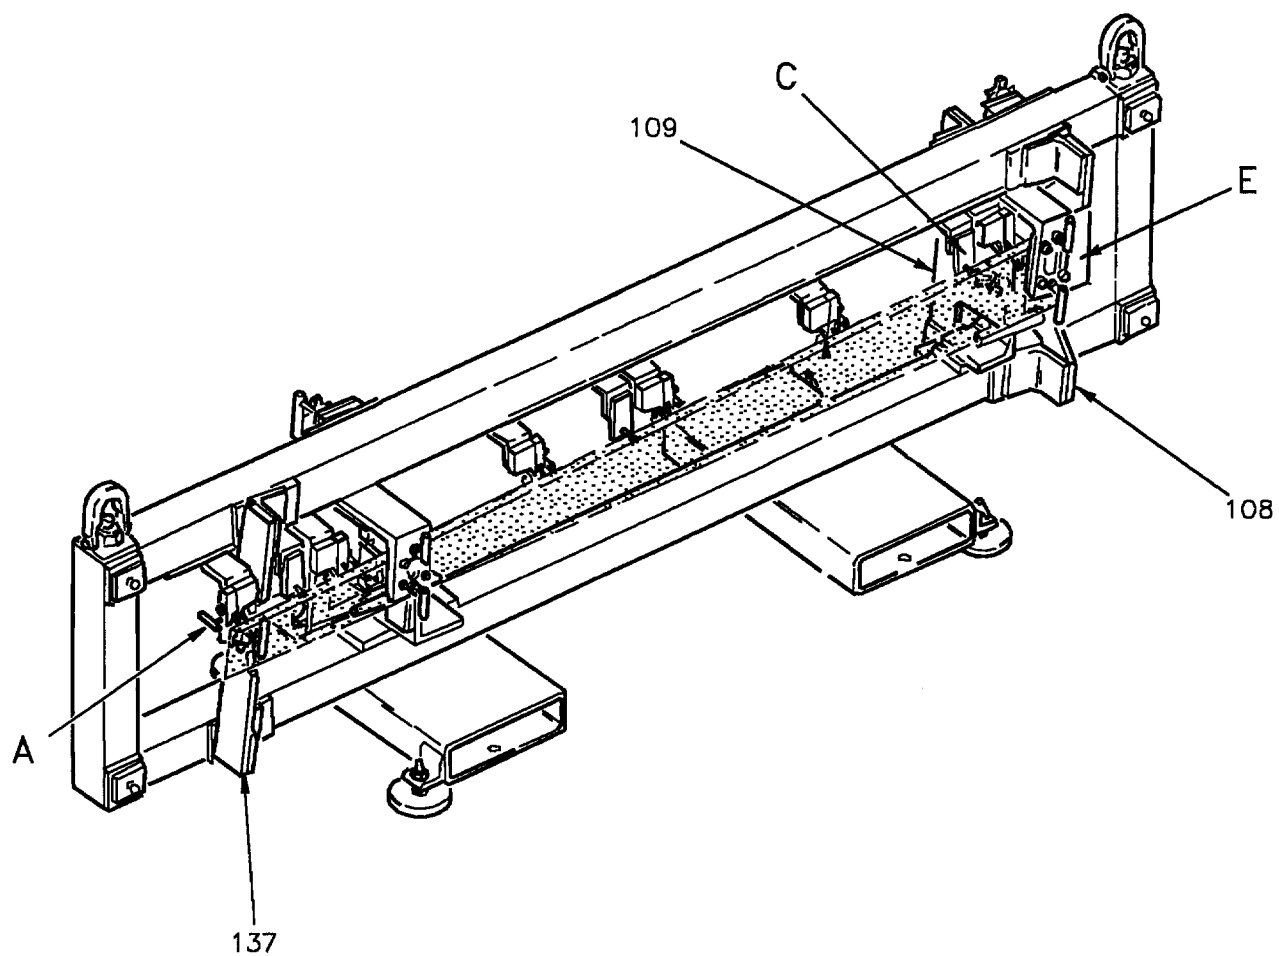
Moldline Contour and Inboard Trim Inspection (Sheet 1)
